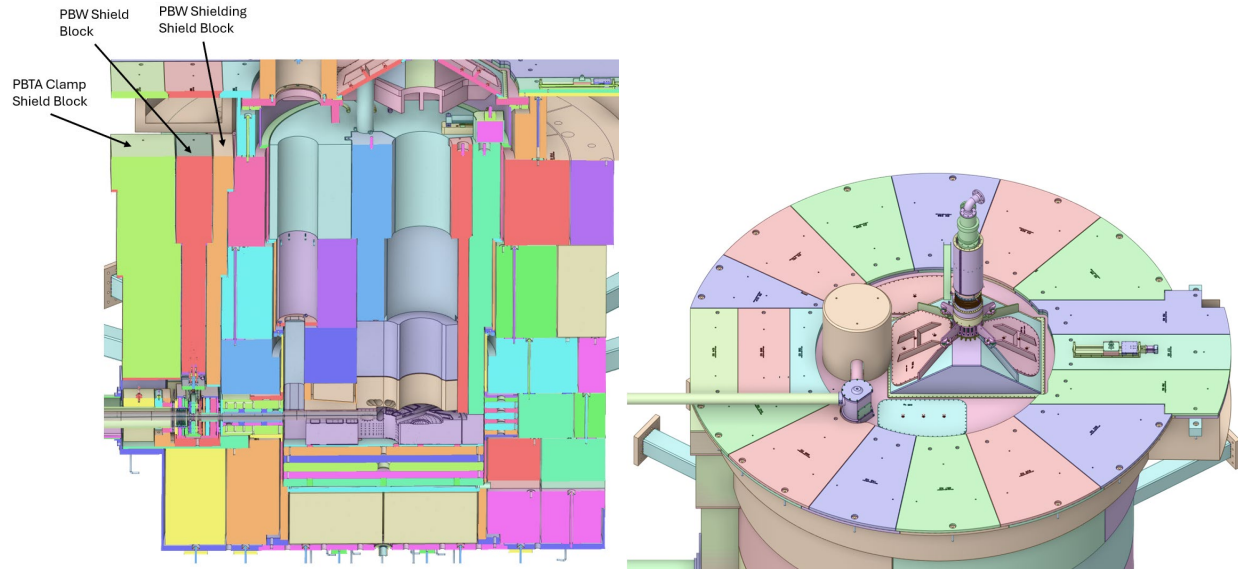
CAD image showing the AIC removable shielding (left) and Pipe Pan removable shield plates (right)
